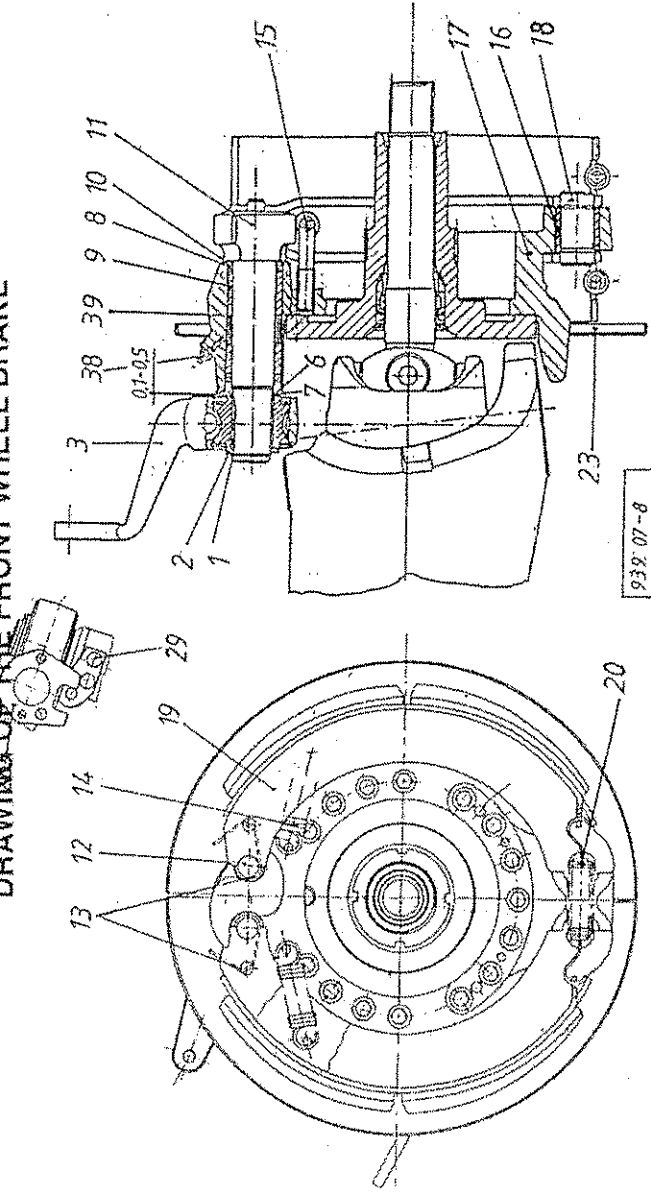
DRAWING OF THE WHEEL BRAKE
